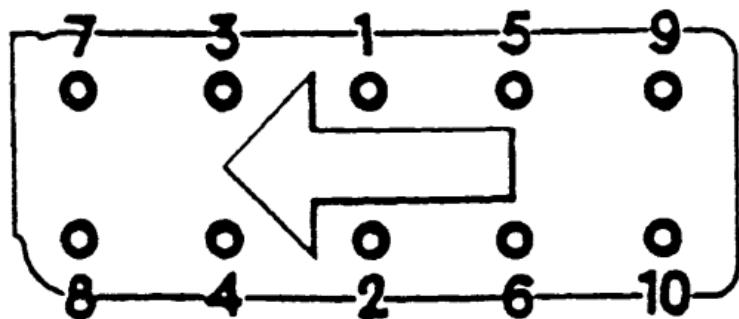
Cylinder head bolt torque sequence for the 2.3L 4-cylinder engines
